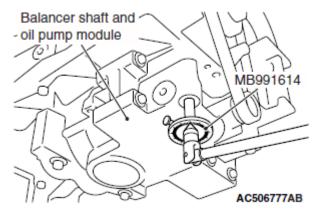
Tightening Balancer Shaft And Oil Pump Module Mounting Bolts Using Special Tool MB991614
